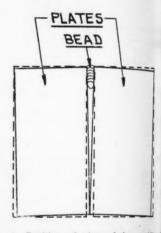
Position of plates before welding indicated by dotted lines. Solid lines the position after welding.
